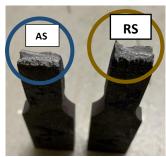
Fracture of MX-TRIVEXtensile specimen at 1200 rpm
